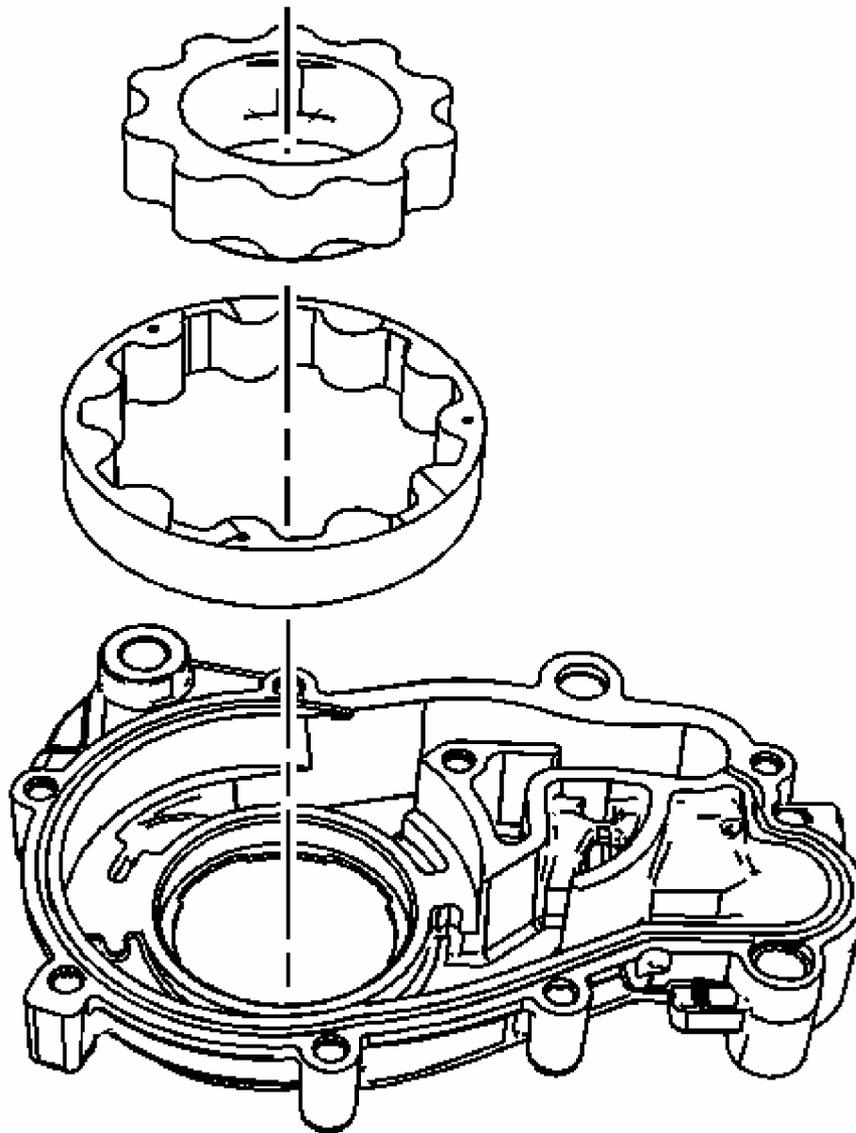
View Of Outer/Inner Oil Pump Drive/Driven Gear
